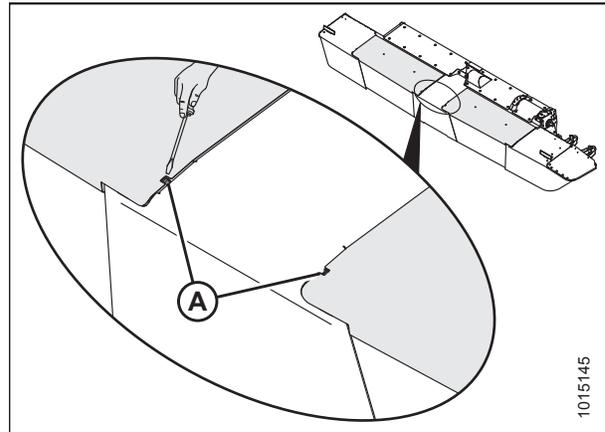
Cutterbar Door Latch Access Hole – Export Only
